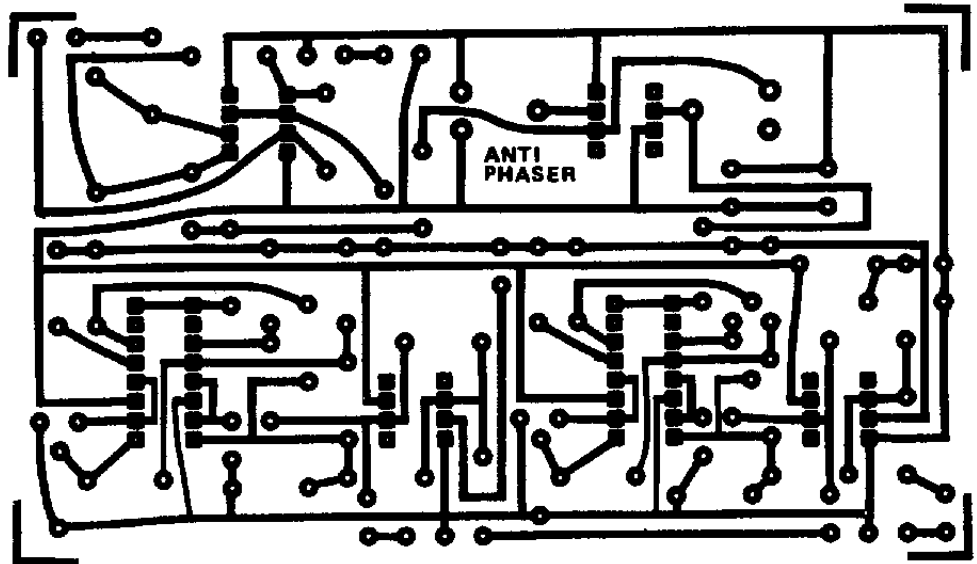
The PCB layout. Assembly is straightforward, but see the note in the text about C10.
